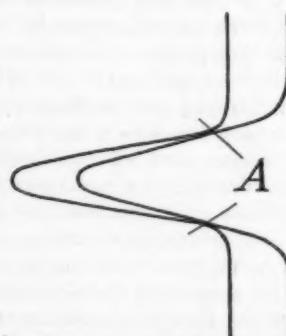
SKETCH OF CROSS SECTION OF HELE SHAW CLUTCH DISKS.
